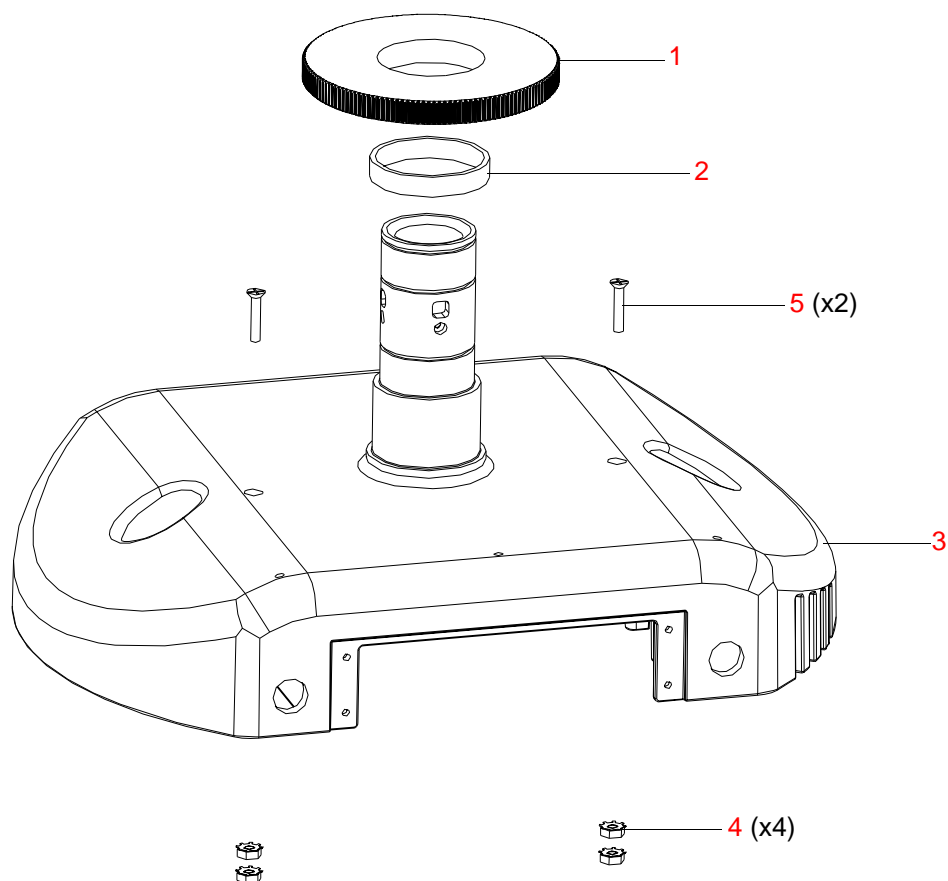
Pan Tube Assembly (VL500/VL500D/VL500A)
